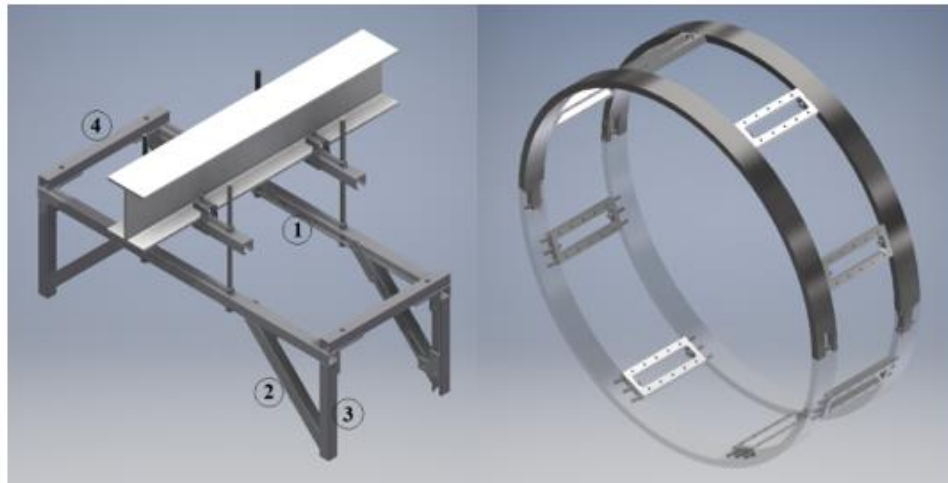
suspension assembly (left) and half-ring and cross-member assembly (right).
